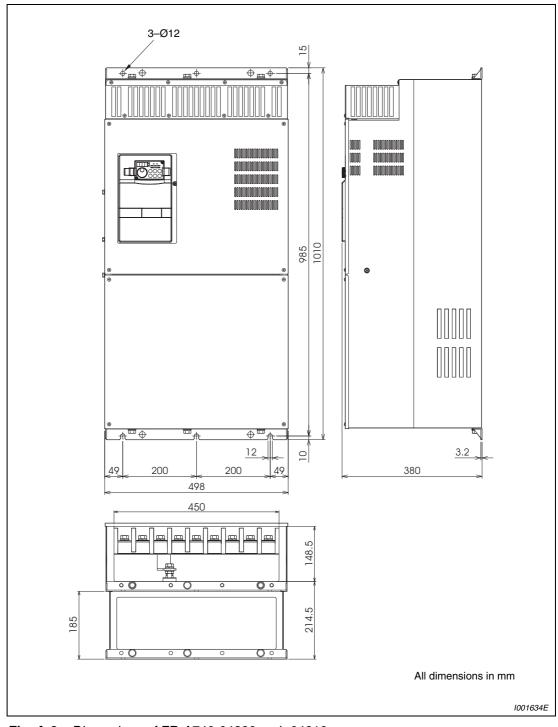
Dimensions of FR-A740-03250 and -03610
